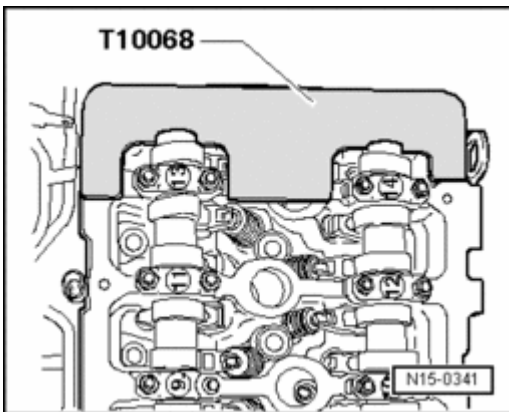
Identifying Camshaft Bar T10068 Engage In Both Shaft Grooves
